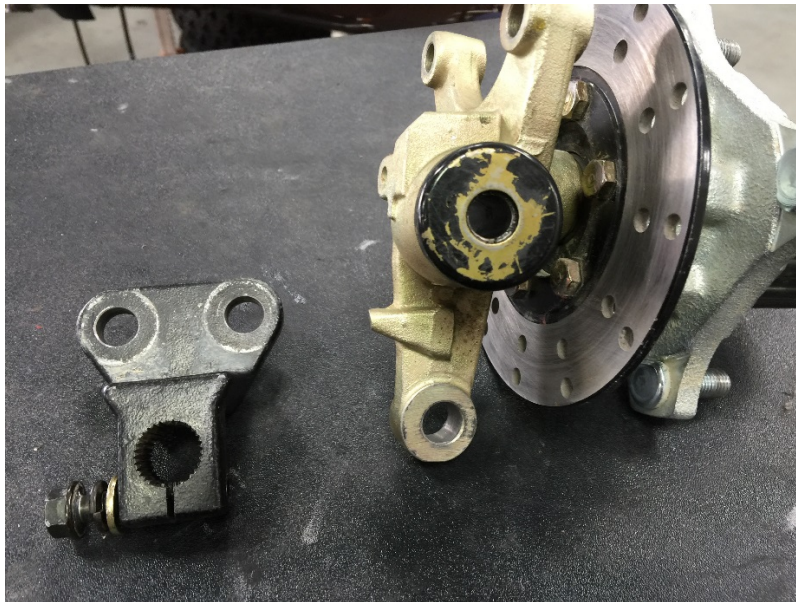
Stock knuckle and pitman arm drilled out to 1/2".
